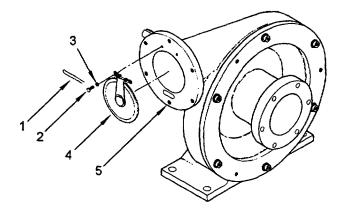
Fuel Transfer Pump Discharge Valve Replacement
